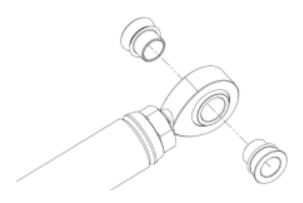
Each rod end gets 2 rod end spacers (also known as misalignment bushings)
